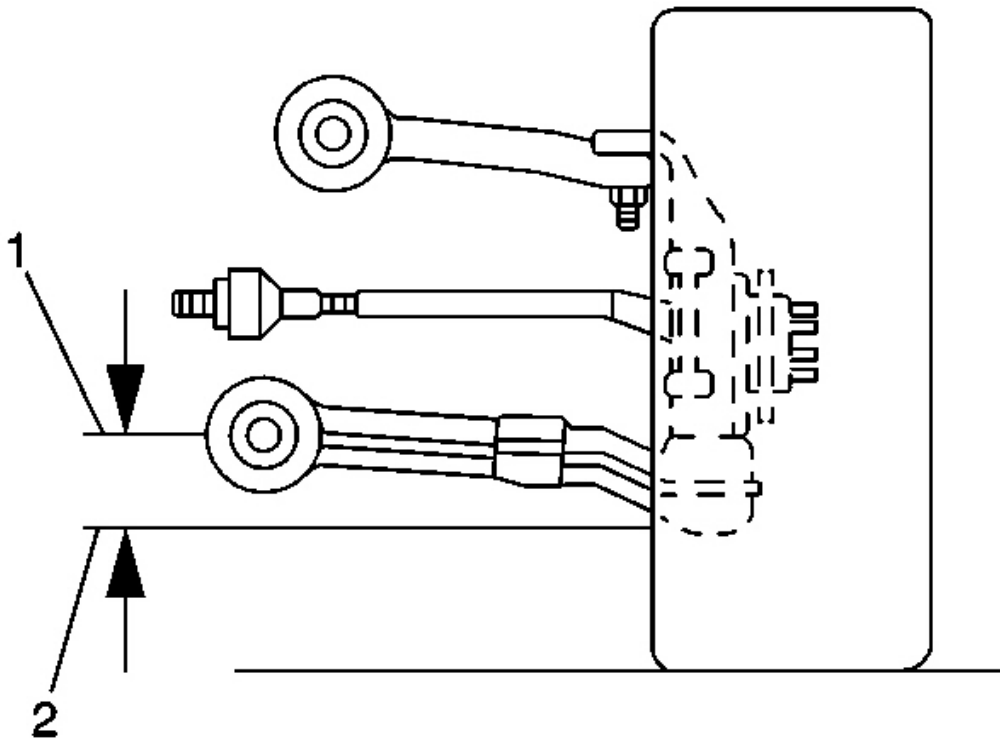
Measuring The Distance Between Lowest Point Of Ball Joint & Center Front Side Of Lower Control Arm Mounting Bolt
